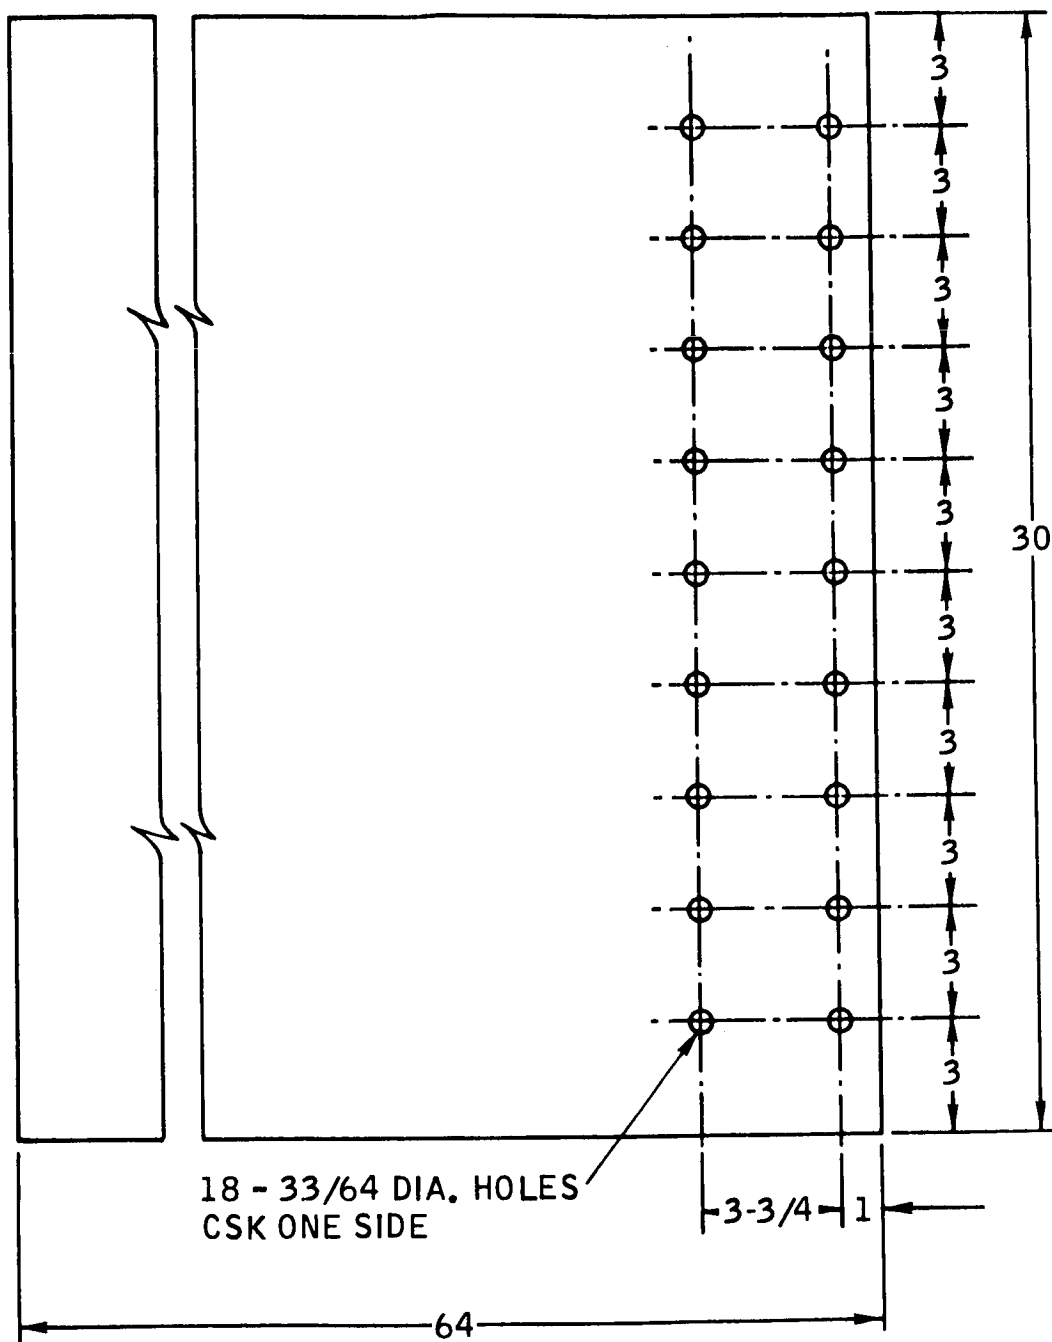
Horizontal Thrust Beam Front Face Plate Detail
